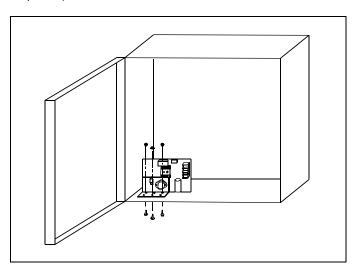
Mounting into a housing with less than 2 inches clearance from the PC board to the back wall.
